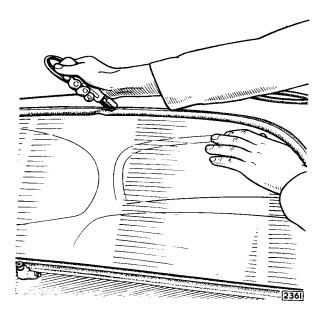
Using the special tool ("B" Fig. 14) when inserting the rubber sealing strip in the windscreen rubber.
